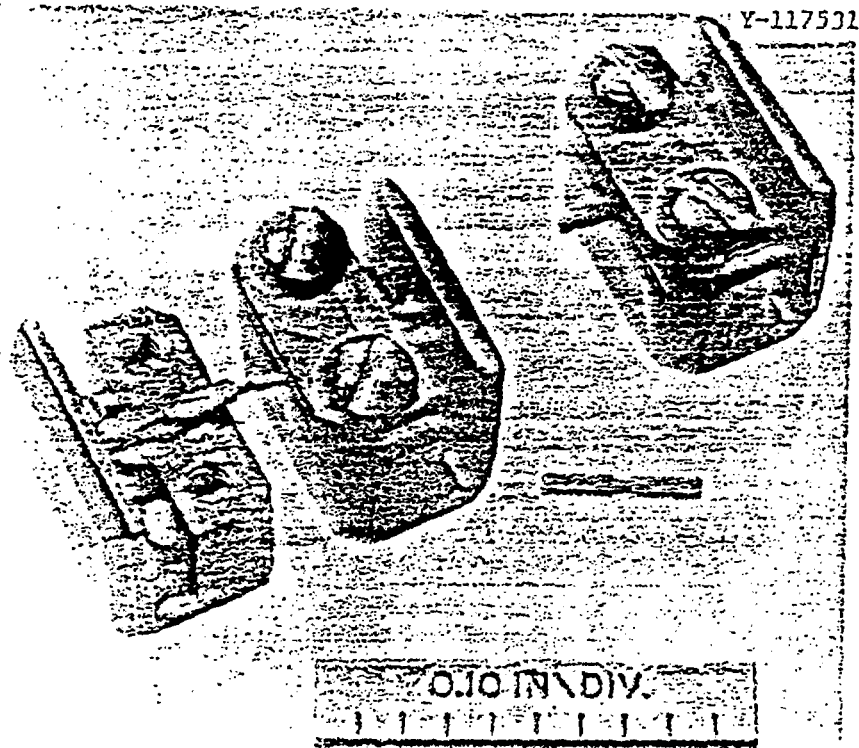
Specimen, specimen holder, and one-half of specimen holder containing fractured specimen for Auger analysis of fracture surface.
